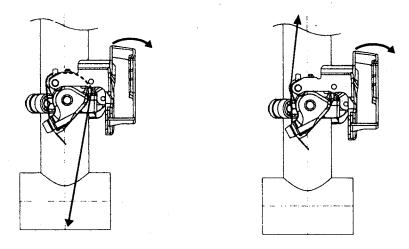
Left: Bottom pull front derailleur. Right: Top pull front derailleur
